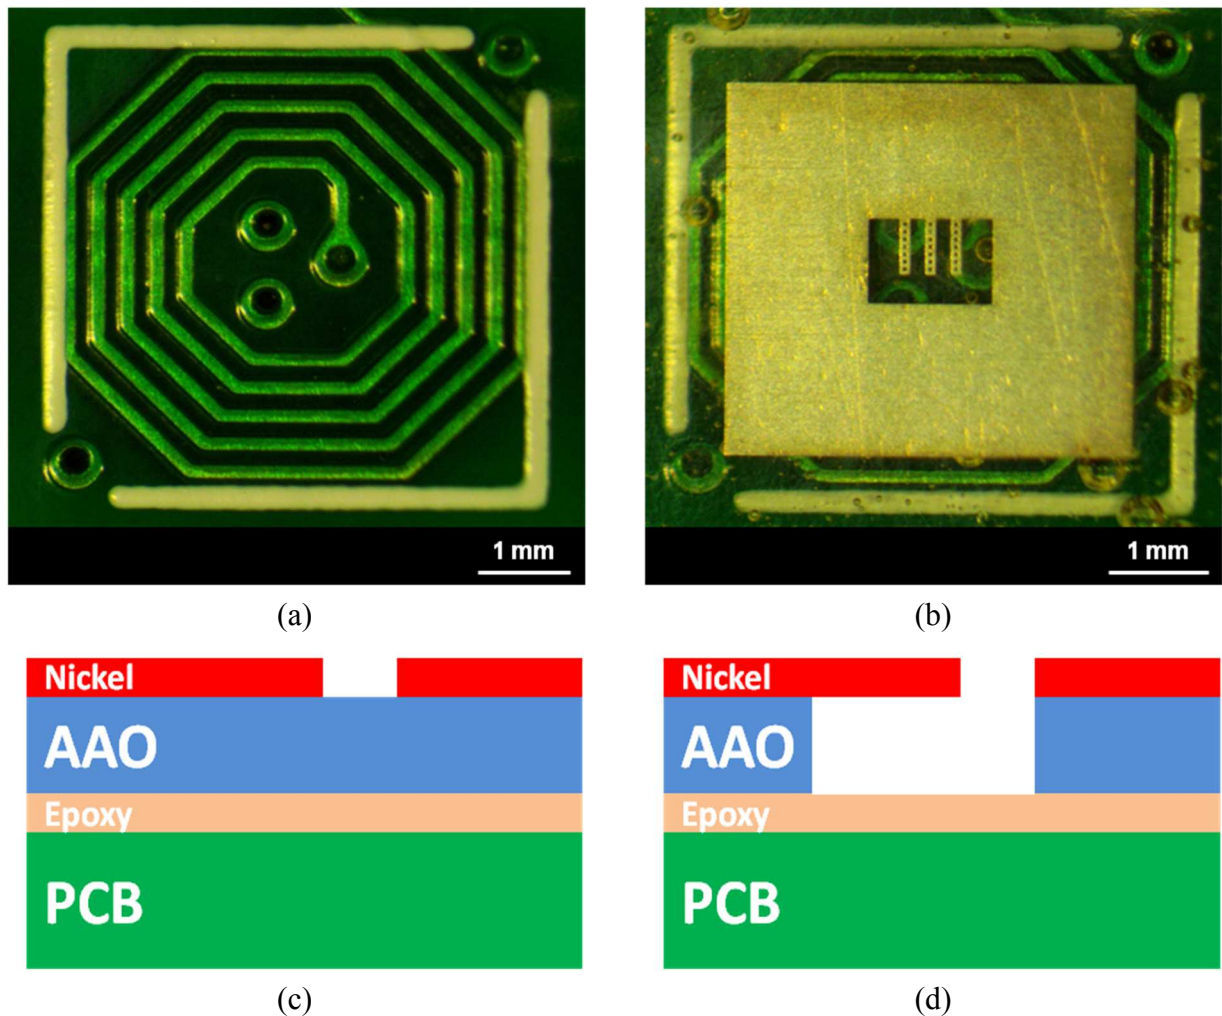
Hybrid integration of an AAO template with a PCB layer.
